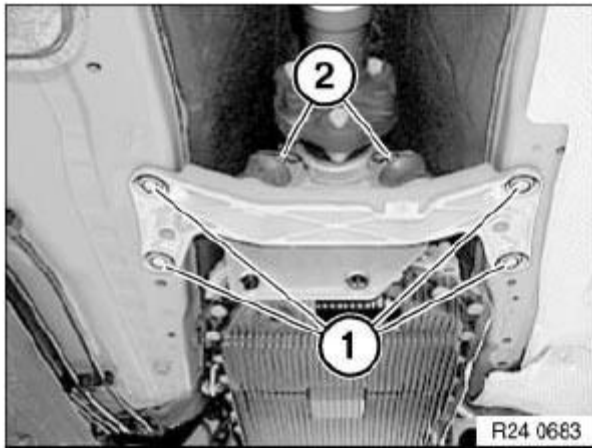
Identifying Transmission Cross-Member Screw And Nut
